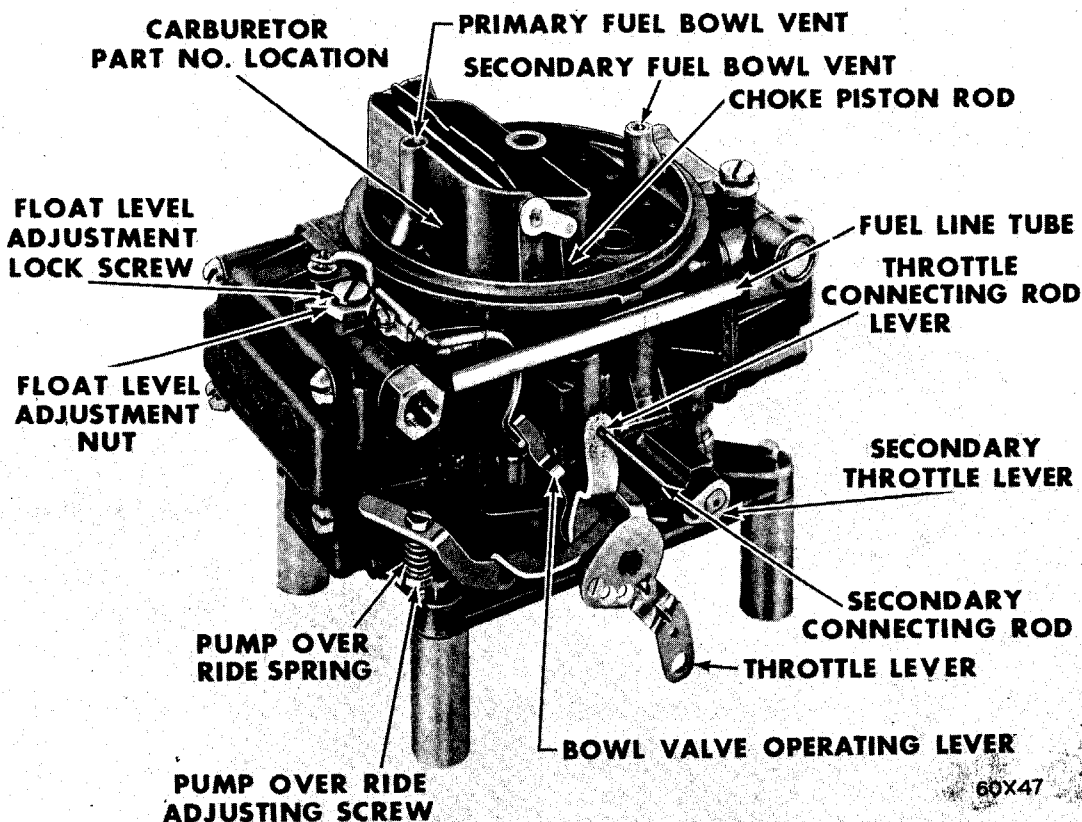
Carburetor Assembly (R2052A and R1971A)
